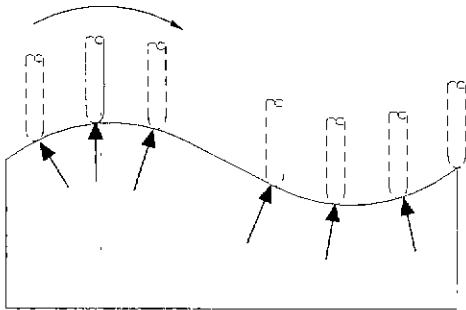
Variation effective tool diameter of ball end mill in free surface machining
